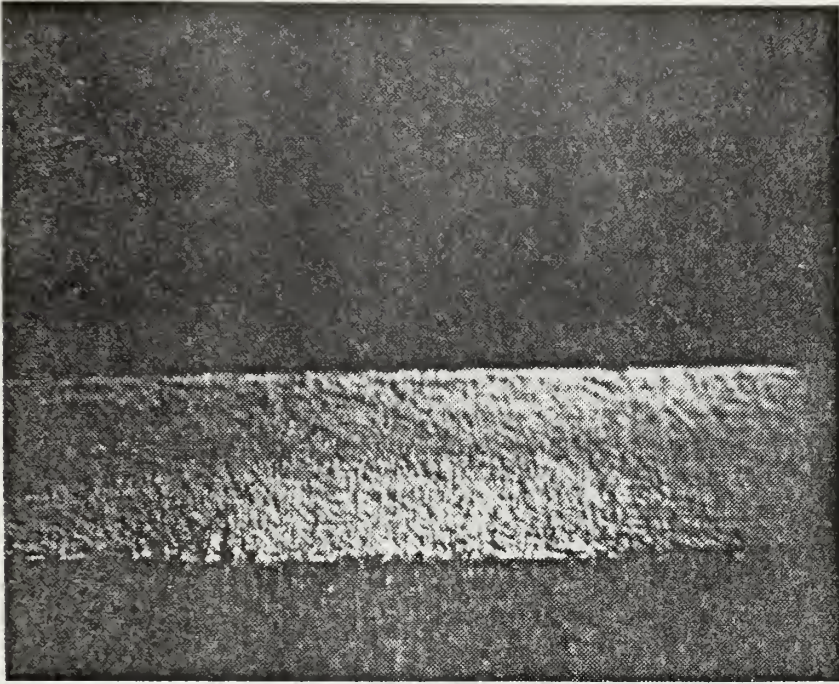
Macro-fractograph of a specimen QT-0-1, which was fractured after 5,300 cycles at 65 ksi, showing half-moon shaped fibrous zone and coarse but flat surface. X10.
